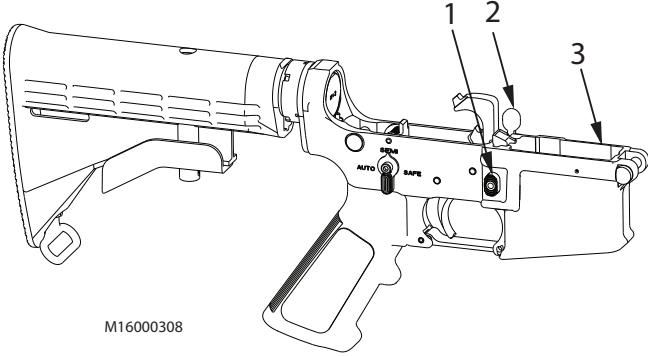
Carbine Lower Receiver and Buttstock Assembly.
